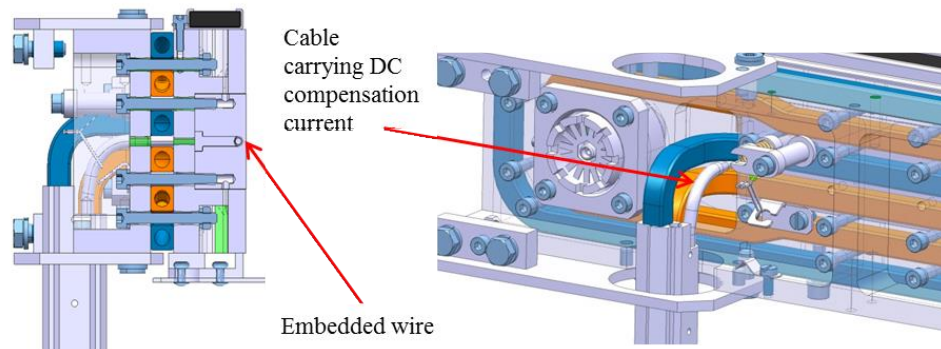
Technical drawing of the wire-in-jaw collimator design.
